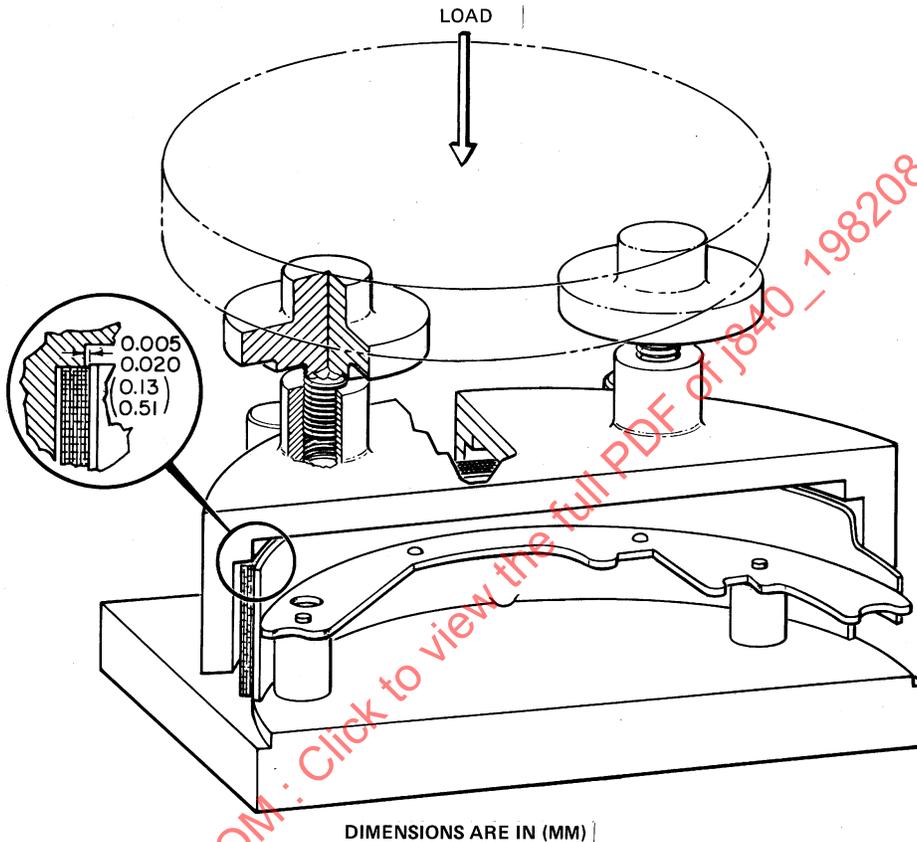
BOND PLANE SHEAR TEST—DRUM BRAKE
